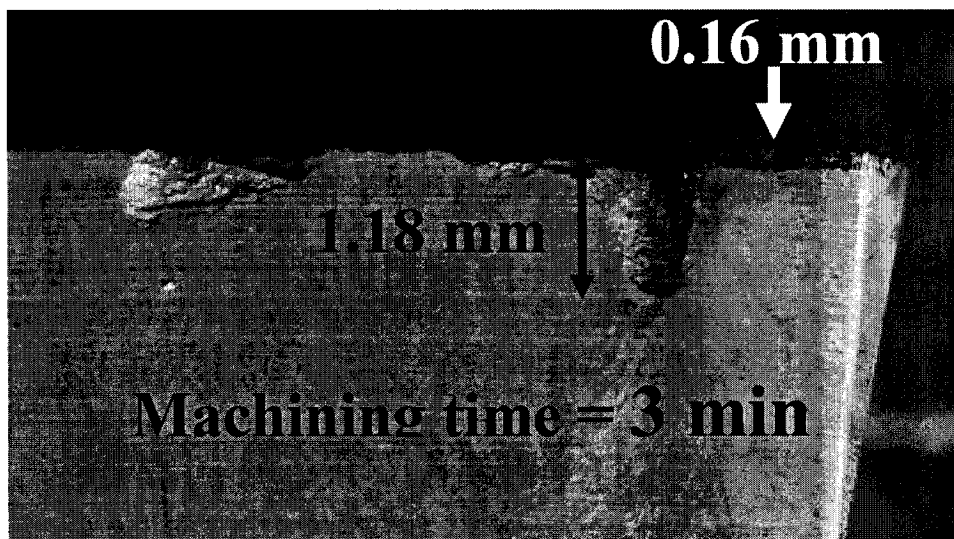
Large notch wear when machining the initial layer ($V_c=600$ ft/min, $f=0.006$ in/rev, $a_p=0.05$ in)
